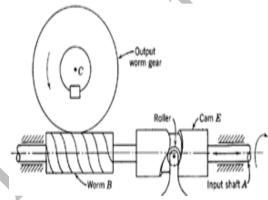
Gear-Cam mechanism with worm gear drive [1]
